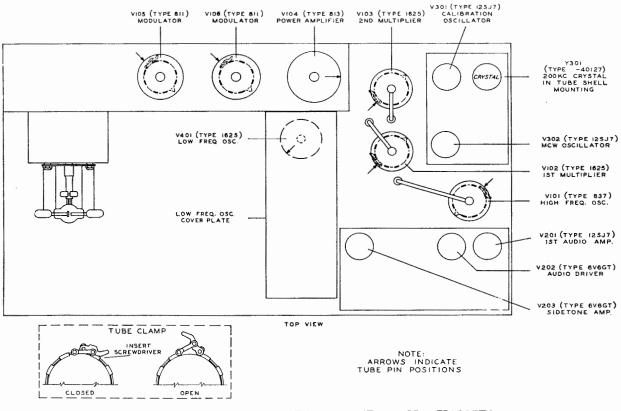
Tube Placement Diagram (Dwg. No. K1627B)
